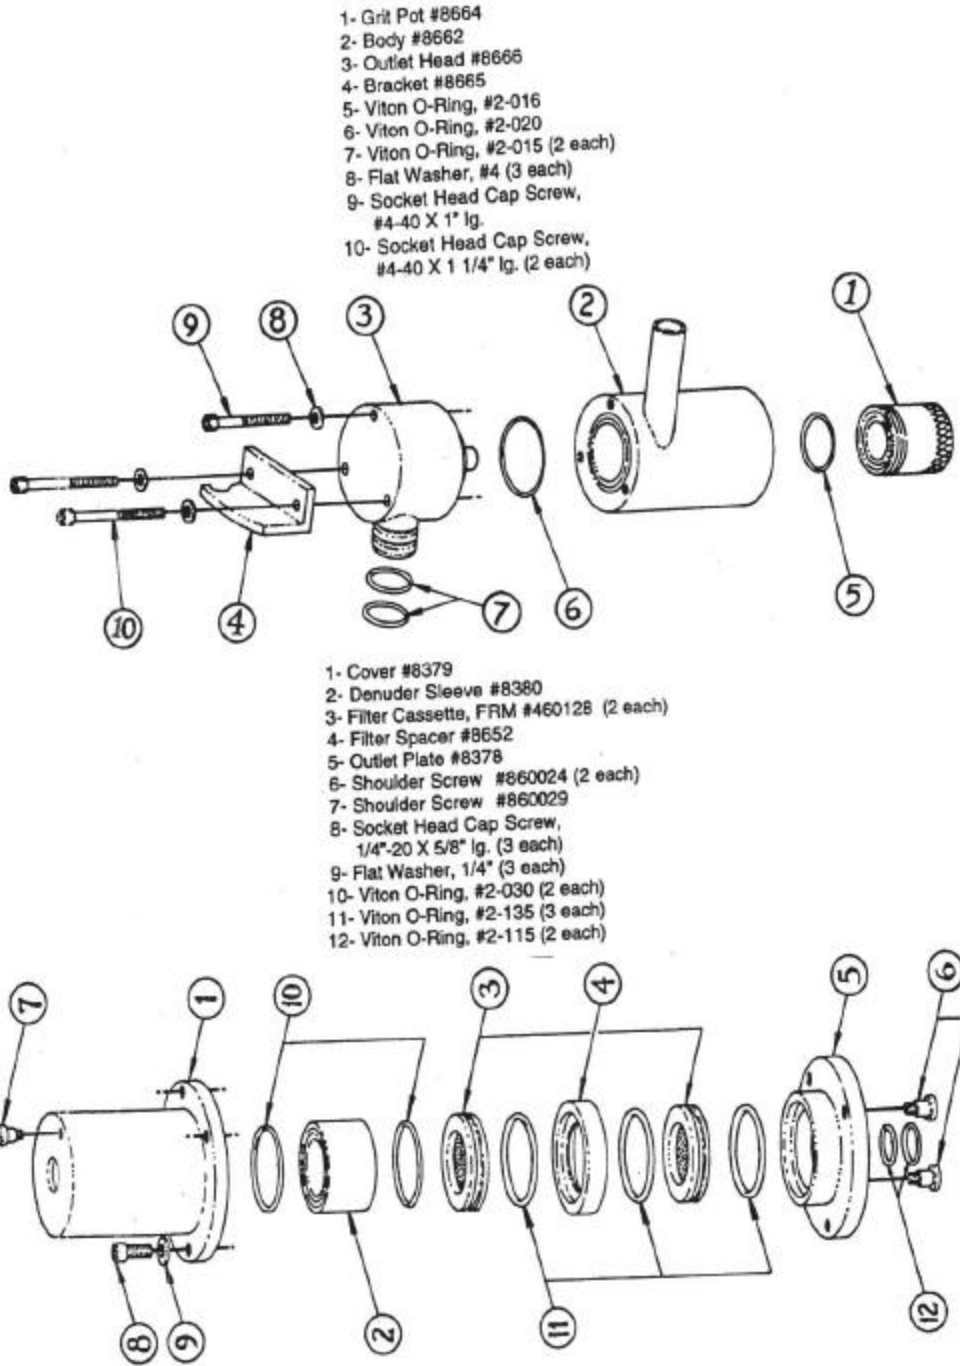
Sharp Cut Cyclone (SCC) and Canister Assembly
